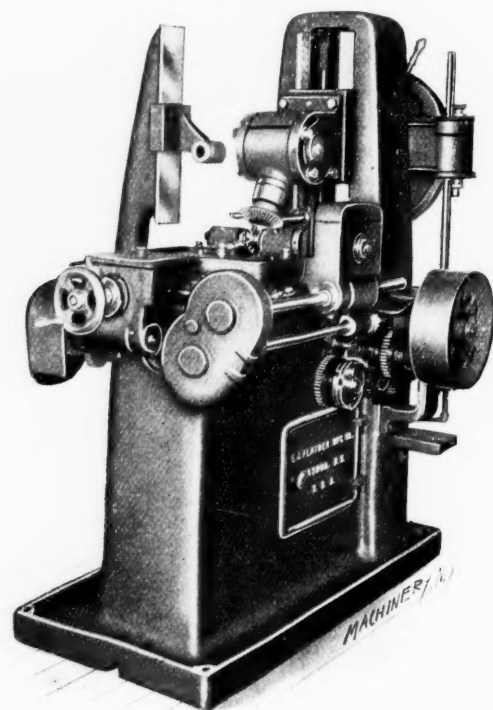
An Attachment to the Flather Automatic Spur Gear Cutter for the Cutting of Bevel Gears.
